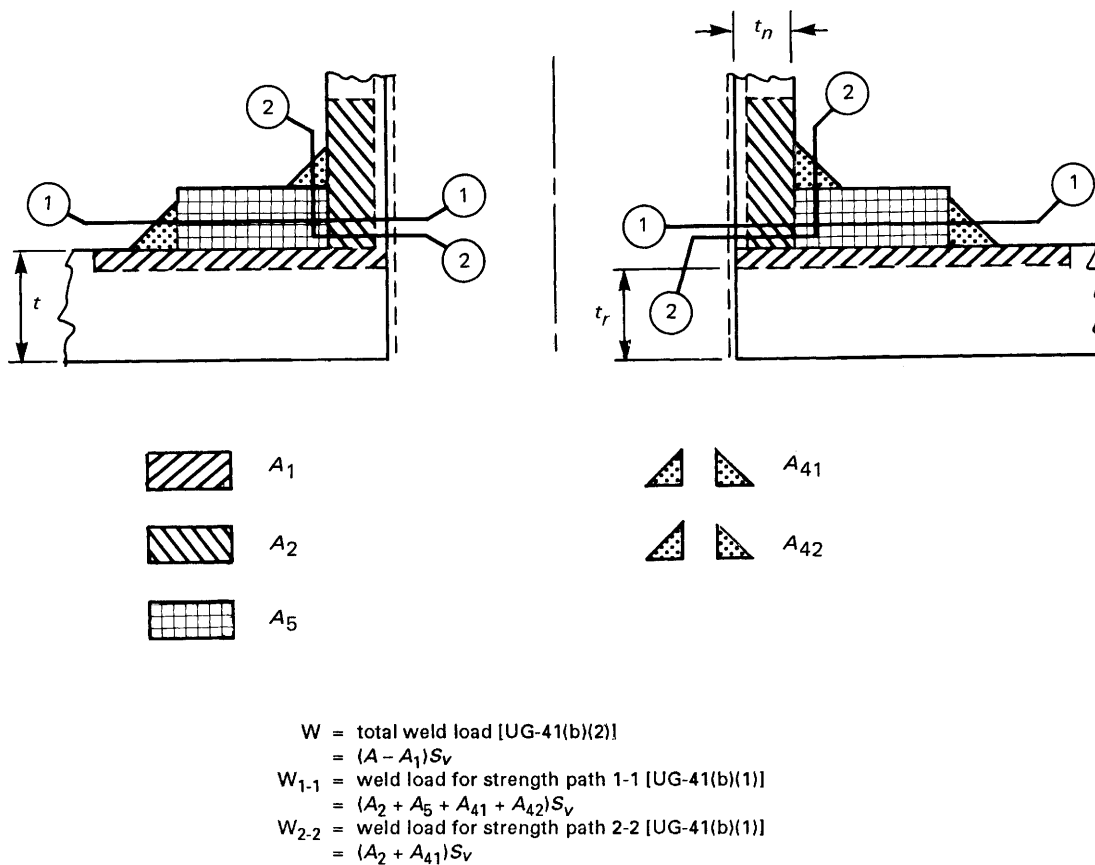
NOZZLE ATTACHMENT WELD LOADS AND WELD STRENGTH PATHS TO BE CONSIDERED (CONT'D)
